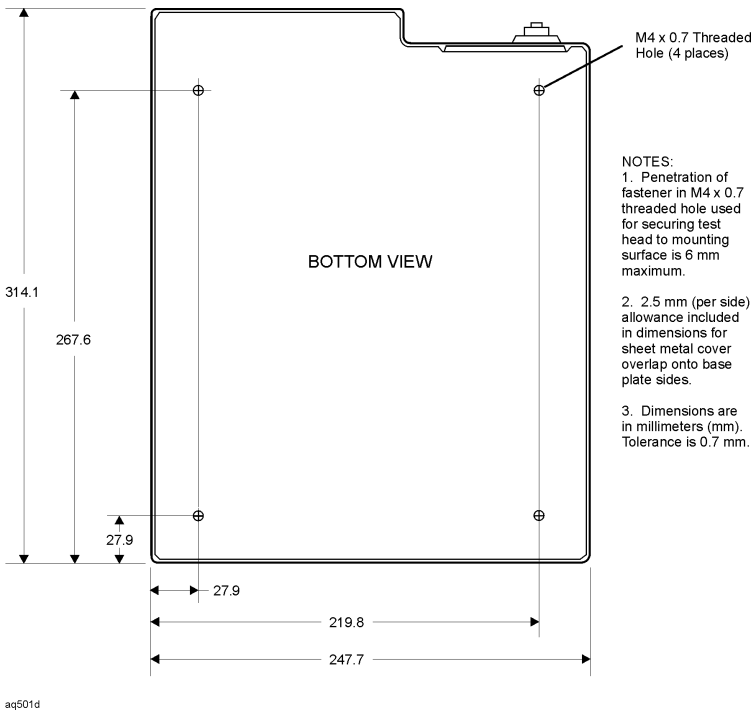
Testhead Footprint Dimensions for Mounting (left or right)
